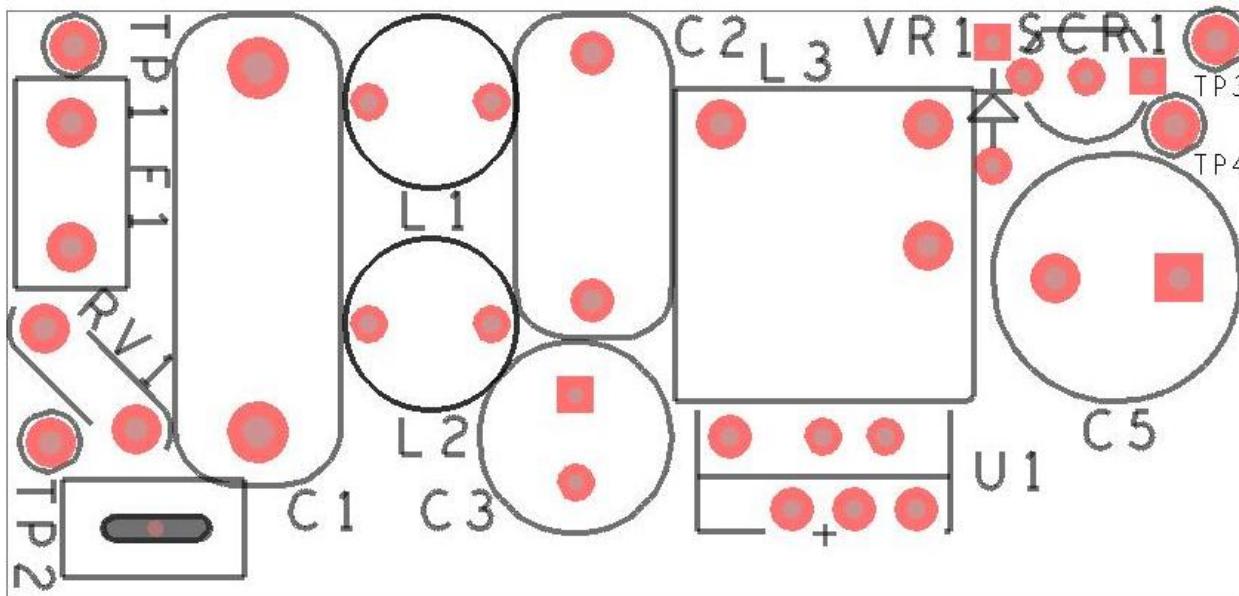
Printed Circuit Layout, Top, 2" (50.8 mm) x 0.95" (24.1 mm).
